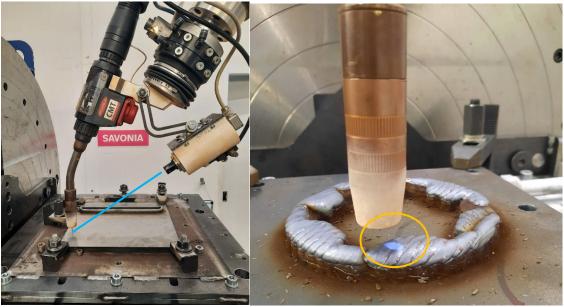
Tool setup with pyrometer and guide pointer of the pyrometer
